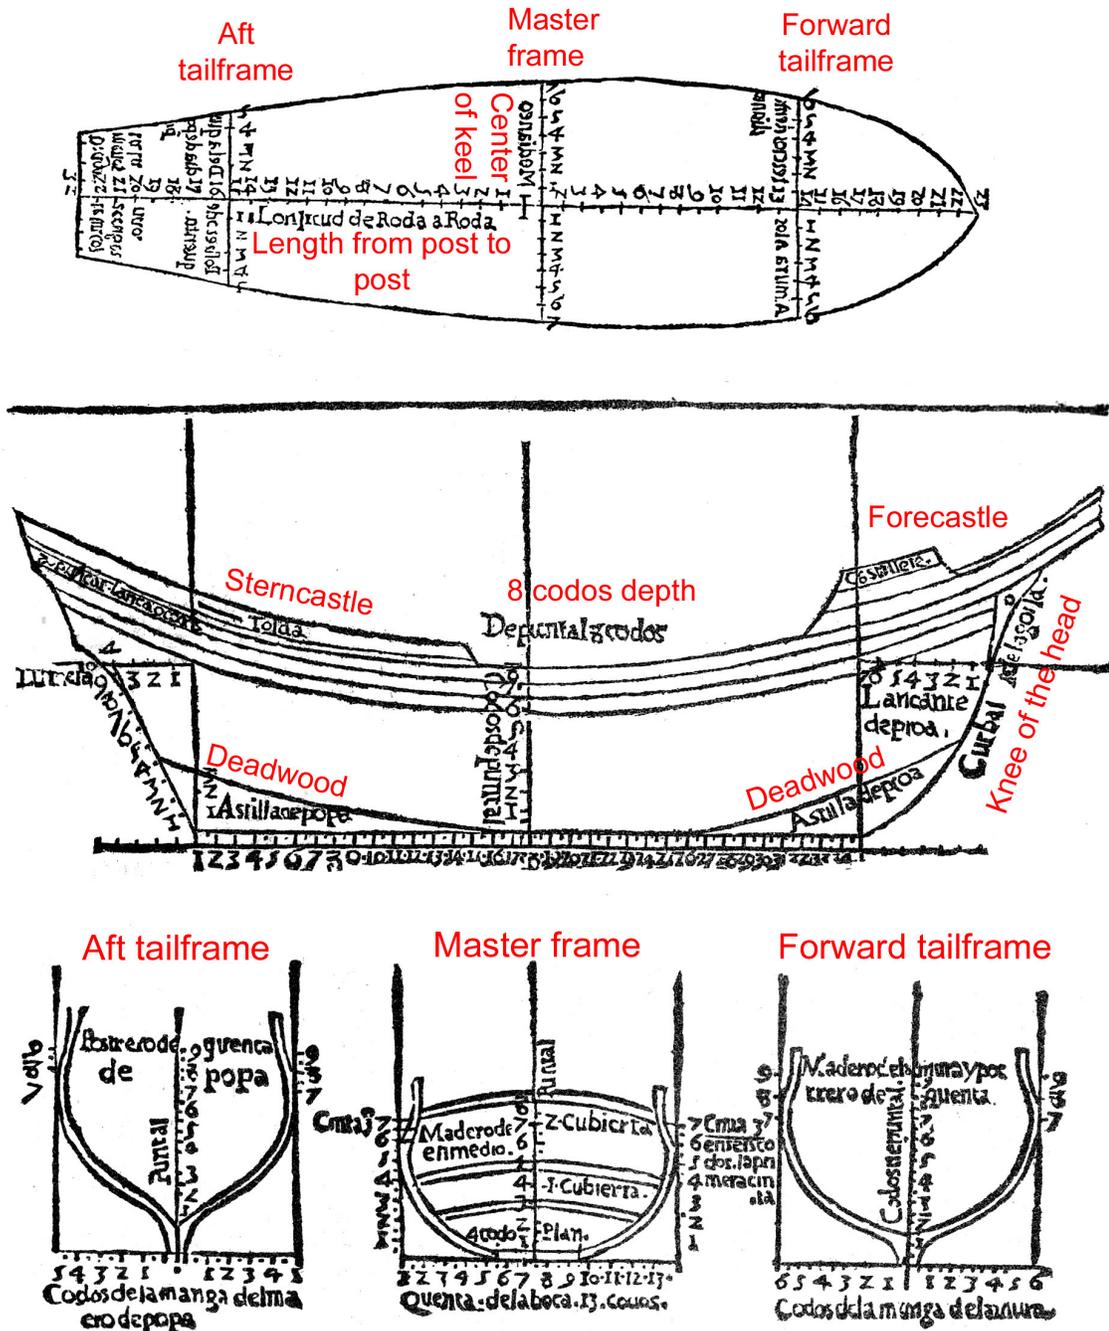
Plan view, sheer view, and sections of the 150-tonelada ship. (After García de Palacio 1944a, 96-7)
